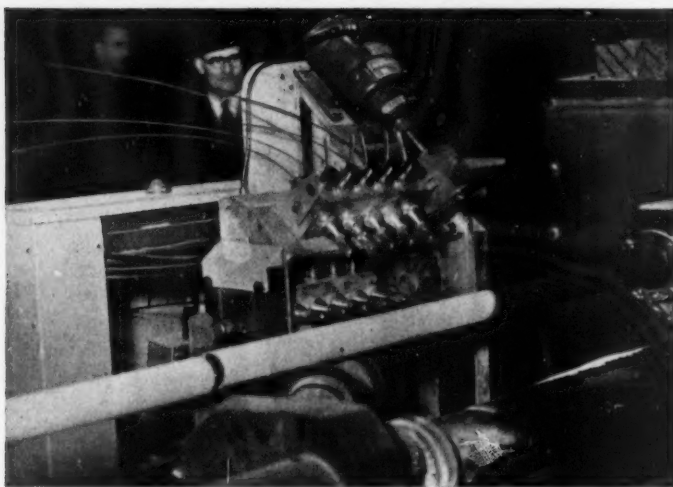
A machine specially designed for zinc spraying tubes. Machines similar to this one have been designed to take tubes from 1 to 6-in. bore. Production speed for a 2-in. tube would be at the rate of 20-ft. per minute when applying a 0.004-in. coating.
